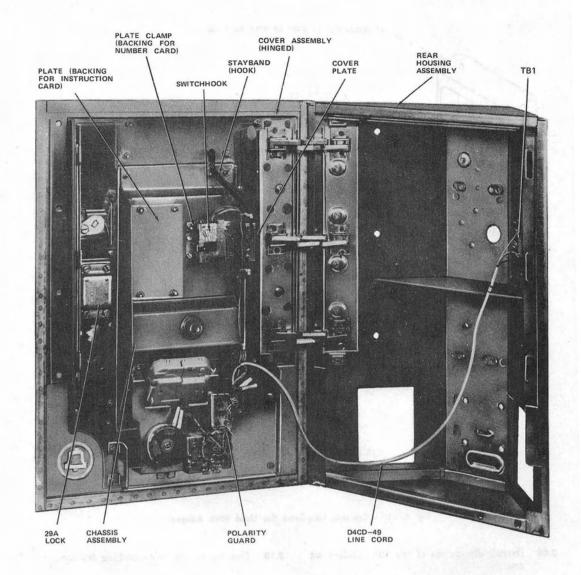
20A Coinless Telephone Set With Cover Assembly Opened
